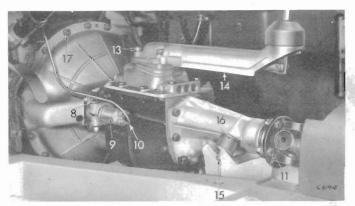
Herald 1200, 12/50 and Spitfire gearbox attachments
